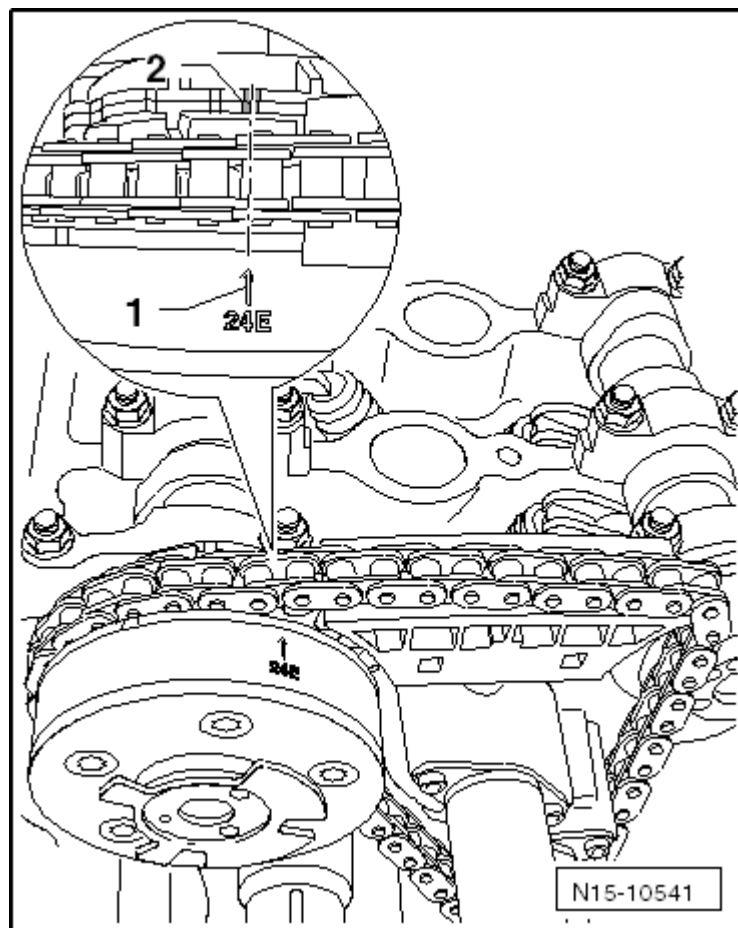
Identifying Camshaft Adjuster Align With Right Notch Of Control Housing
